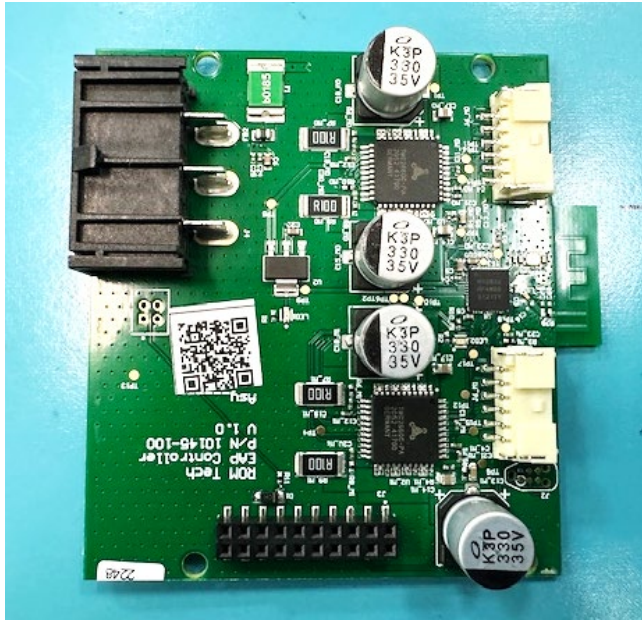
; Top side EAP Controller Board, 10145-200 Rev 2
